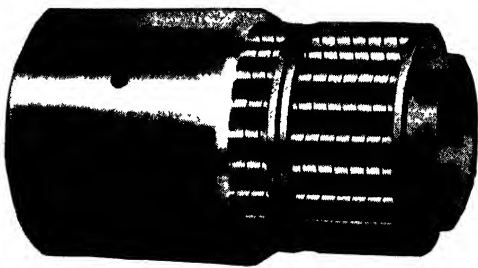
Wound Roller Radial Bearing Double Roller Assembly
